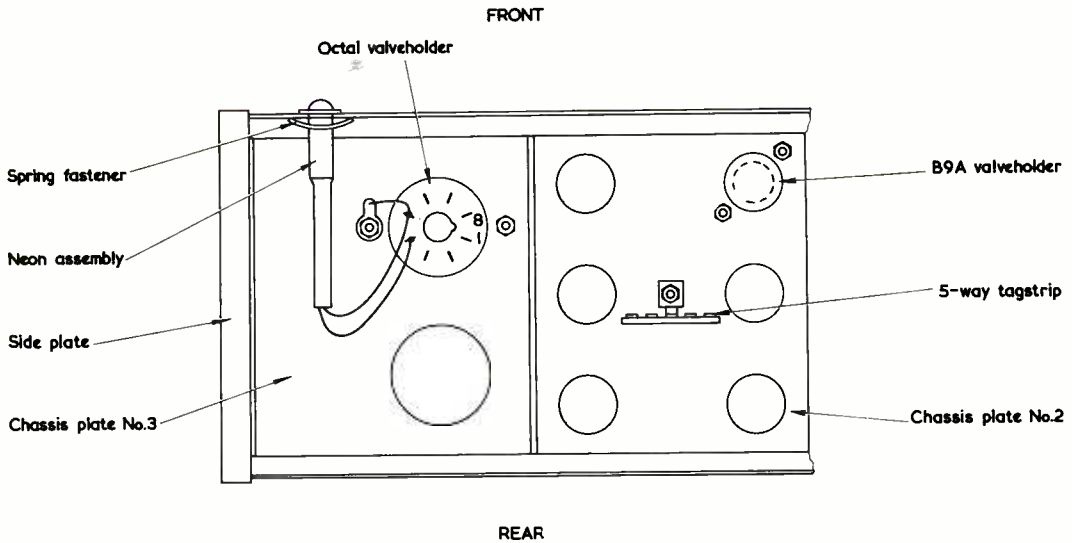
Underchassis view showing how the 5-way tagstrip and neon bulb assembly are fitted
